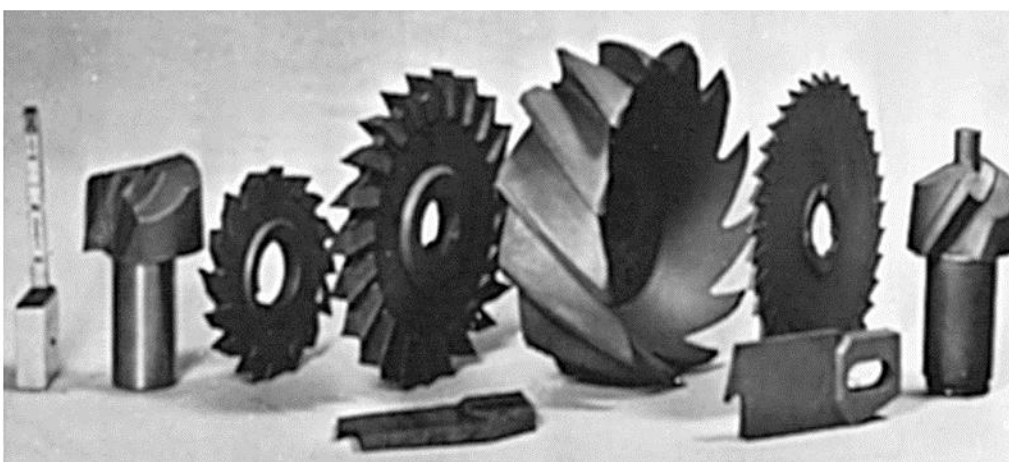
Group of intricate cutters produced by ceramic mold casting. (Courtesy of Avnet Shaw Division of Avnet, Inc., Phoenix, AZ)
